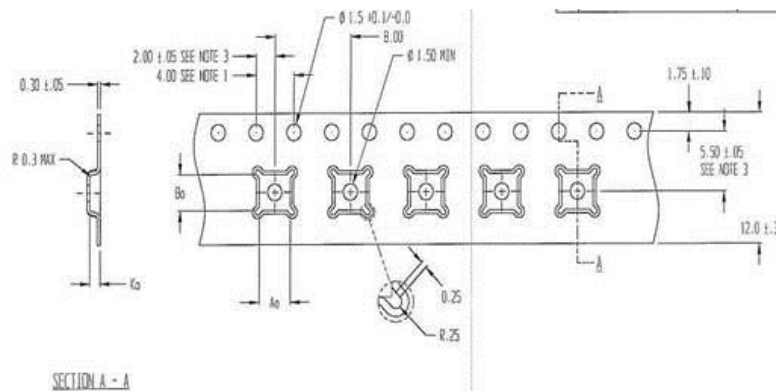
Tape drawing for 3x3mm packages A0=3.30, B0=3.30, K0=1.10
